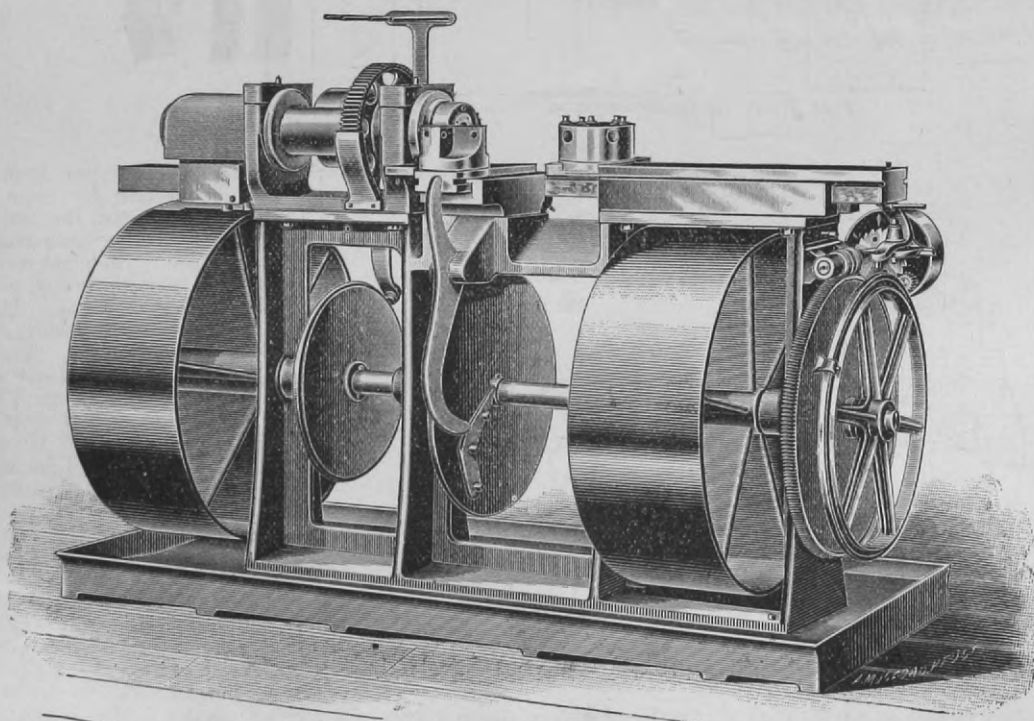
Automatic Screw Machine with Turret on the Cross Slide.
